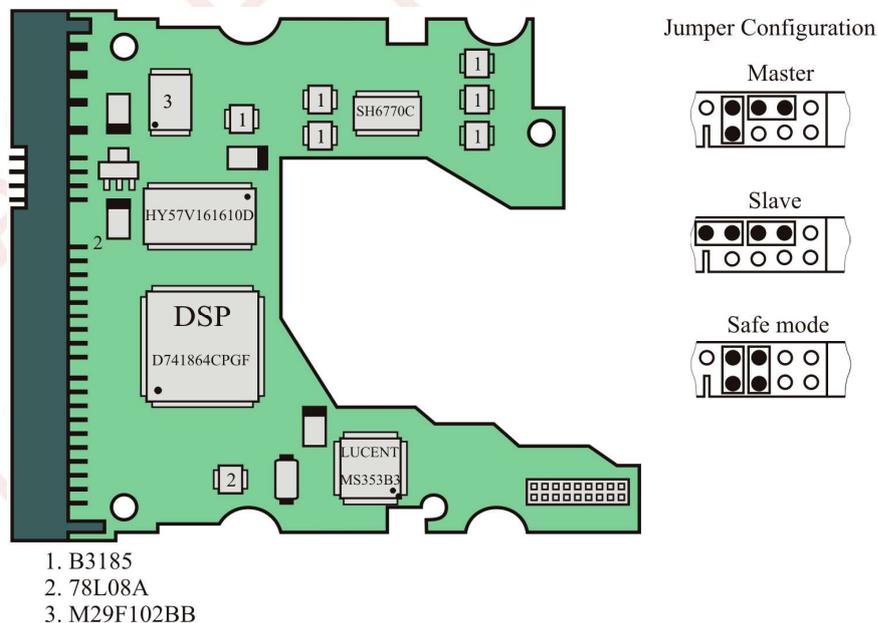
External view of the controller board in MAXTOR NIKE drive family.
